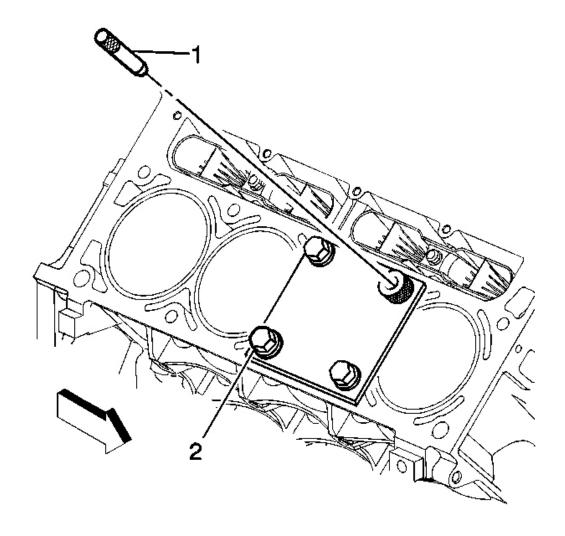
View Of Alignment Pin & Fixture Retaining Bolts Courtesy of GENERAL MOTORS CORP.
